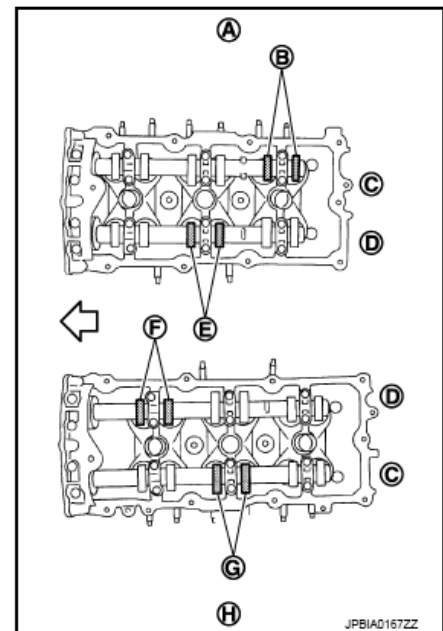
Identifying Valve Clearances Measuring Position (No. 3)
